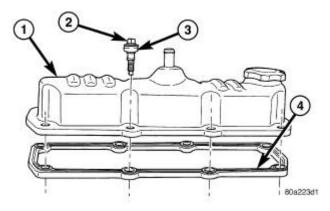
CYLINDER HEAD COVER GASKET Courtesy of CHRYSLER LLC
